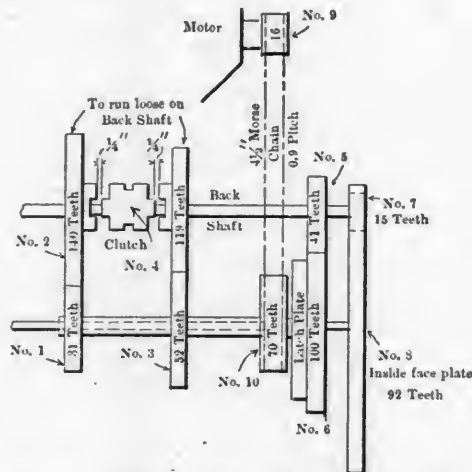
ARRANGEMENT OF GEARING UPON A 42-IN. NILES TRIPLE-GEARED LATHE.
